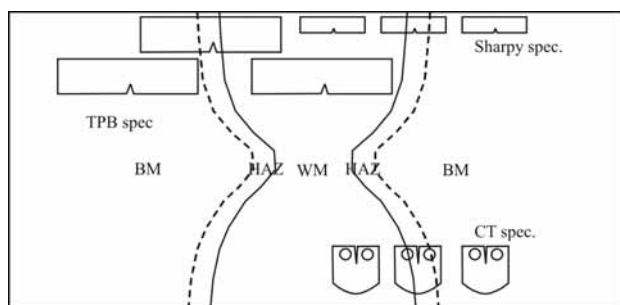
Scheme of testing sample of double "U" weld metal and specimens sampling ⁶
